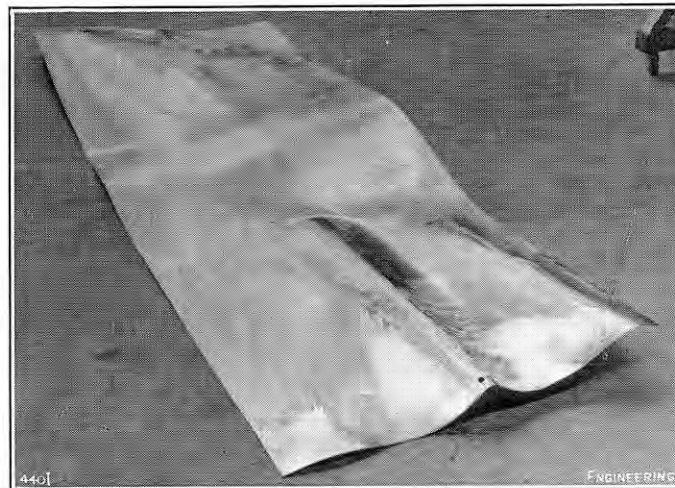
PRE-FORMED SHEET FOR BLADE SHELL.
